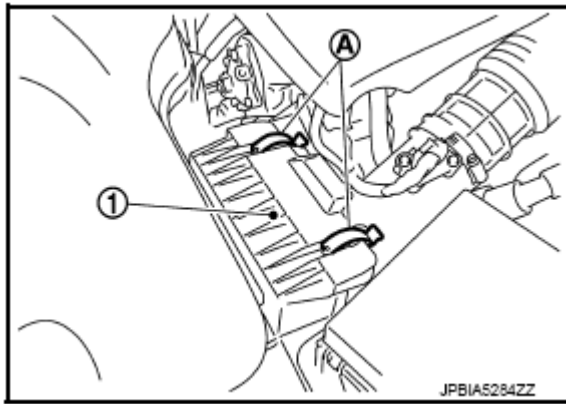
Locating Air Cleaner Filter Holder And Clips
